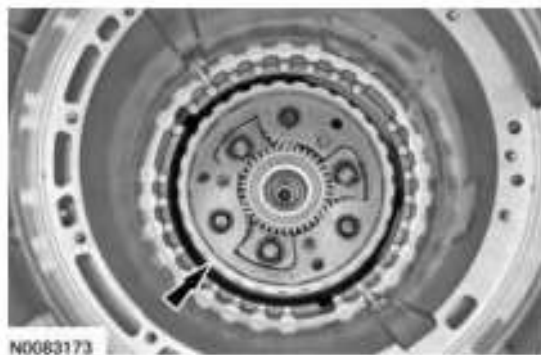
Installing Sun Gear Into Planet Assembly
